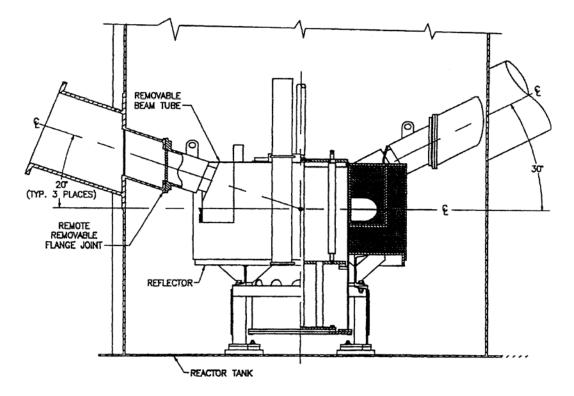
TYPICAL IN-TANK REACTOR CORE AND BEAM TUBE ASSEMBLY
